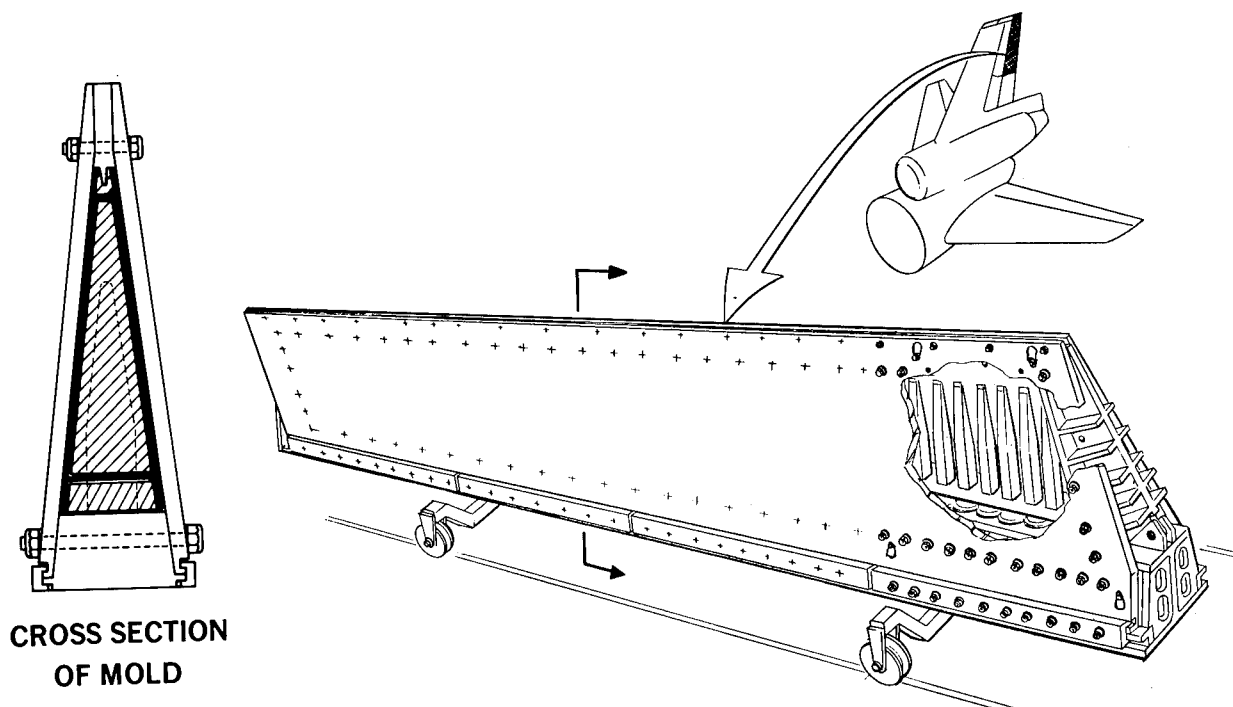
COMPOSITE RUDDER MOLDING DIE
